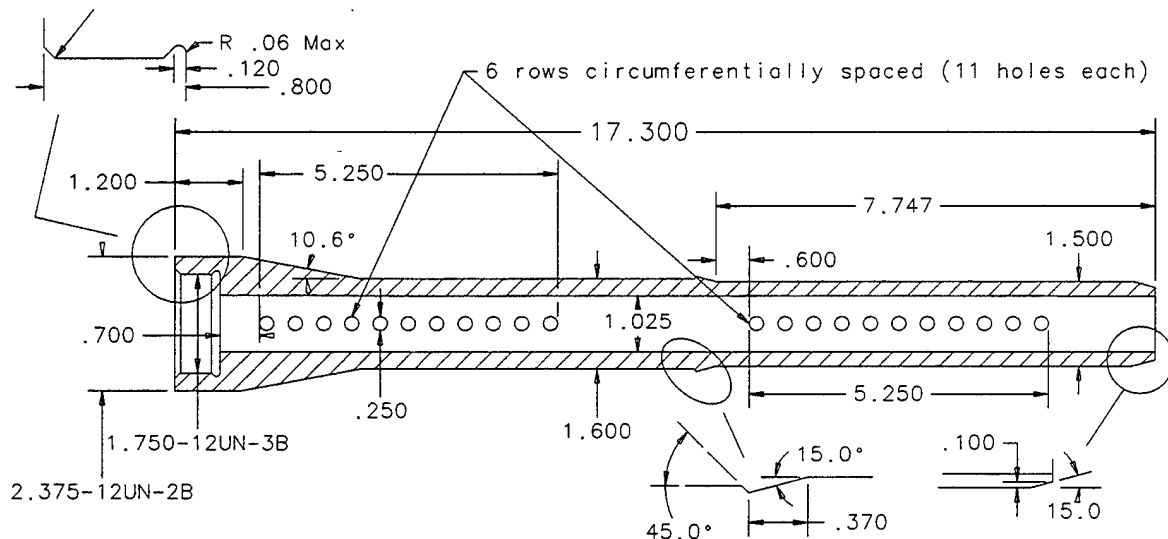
Holed Barrel Extension (Dimensions in Inches).
